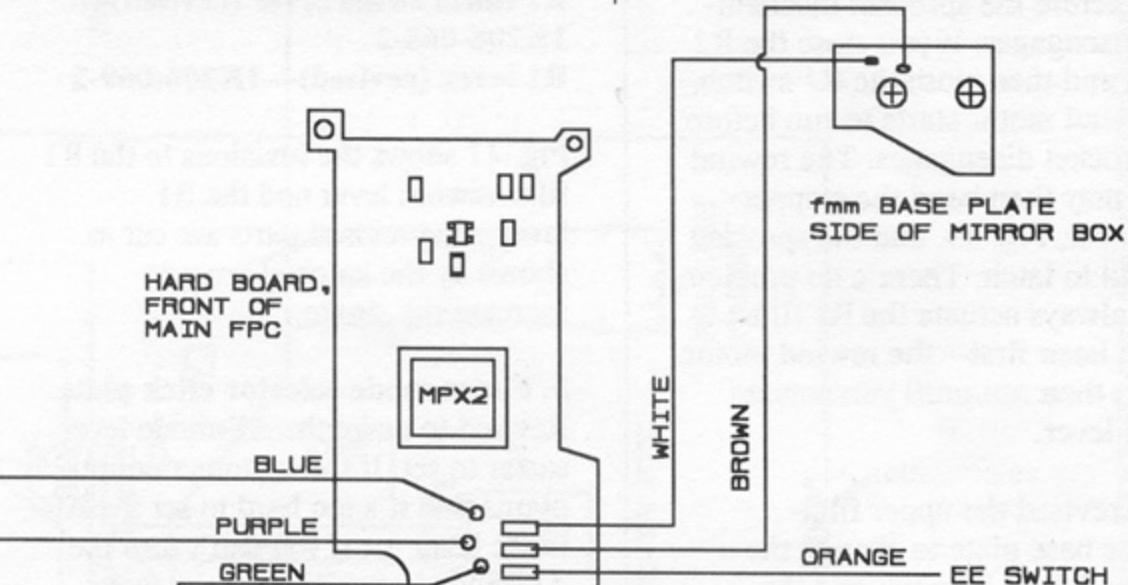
WIRING TO MAIN FPC, FRONT REWIND SIDE OF LENS
